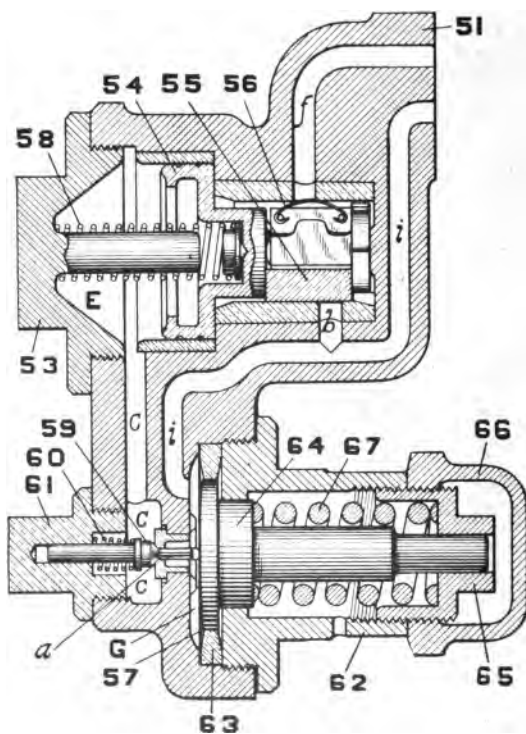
shows a central section through the supply-valve case and governing device, and Fig. 5 a central section through the regulating valve and spring box and a transverse section through the supply-valve case.
